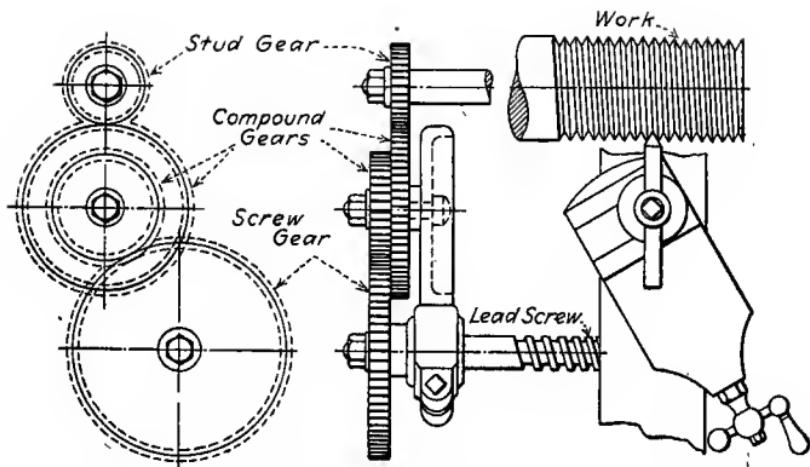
FIG. I. SIMPLE TRAIN OF GEARS FOR THREAD CUTTING
